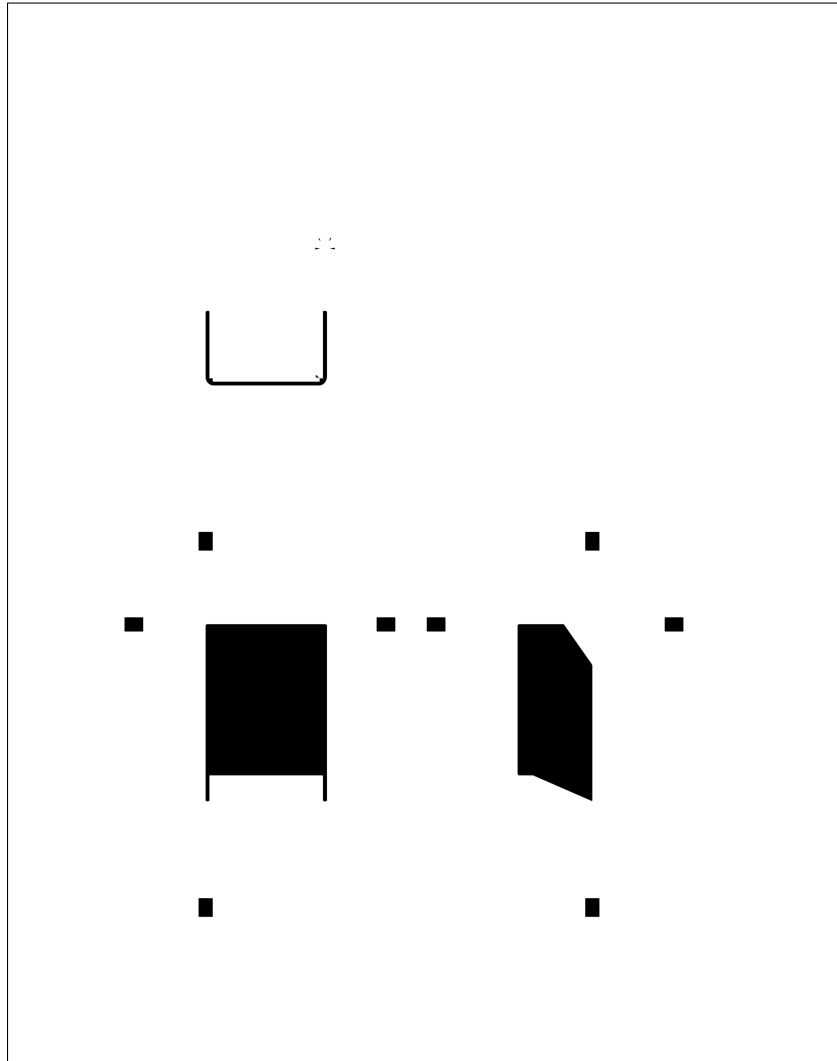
Filled Drawing after removal of dimensioning lines.
